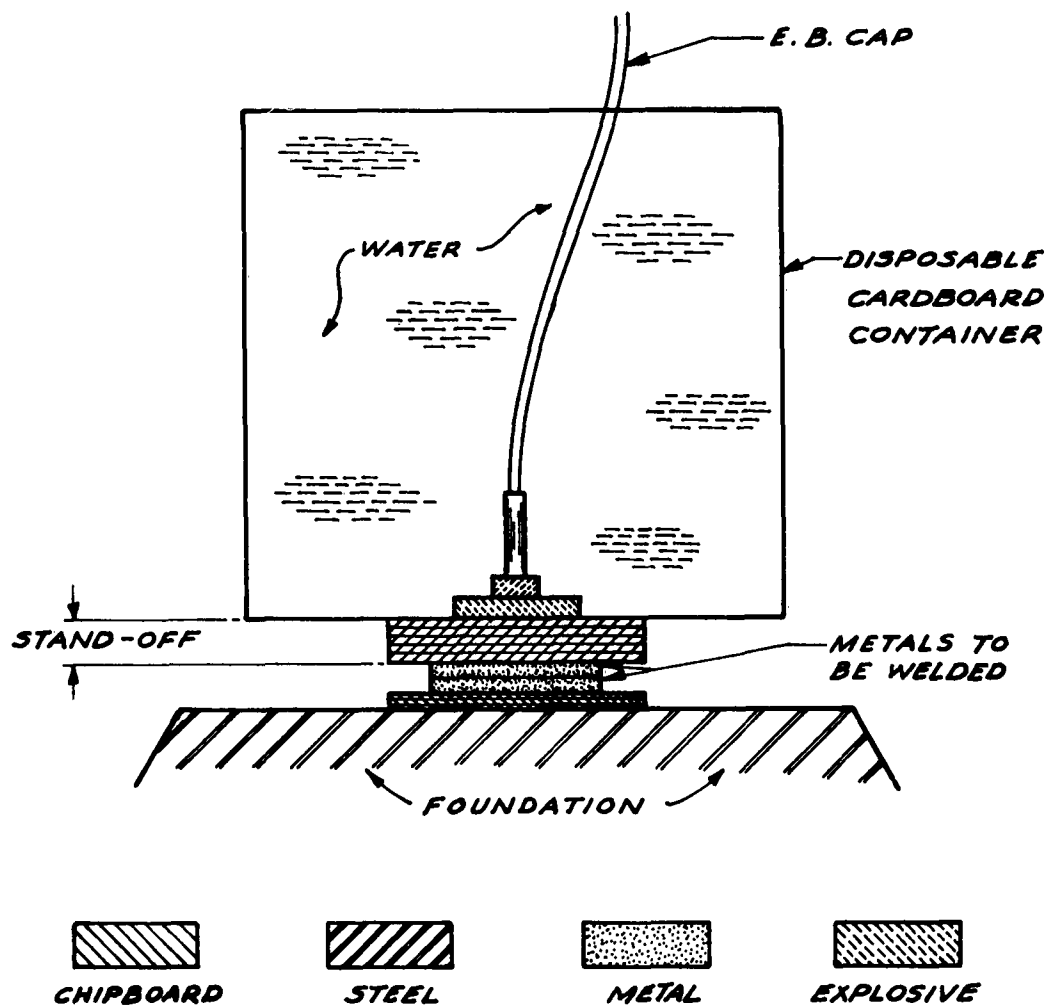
TOP INITIATION FOR EXPLOSIVE WELDING.
